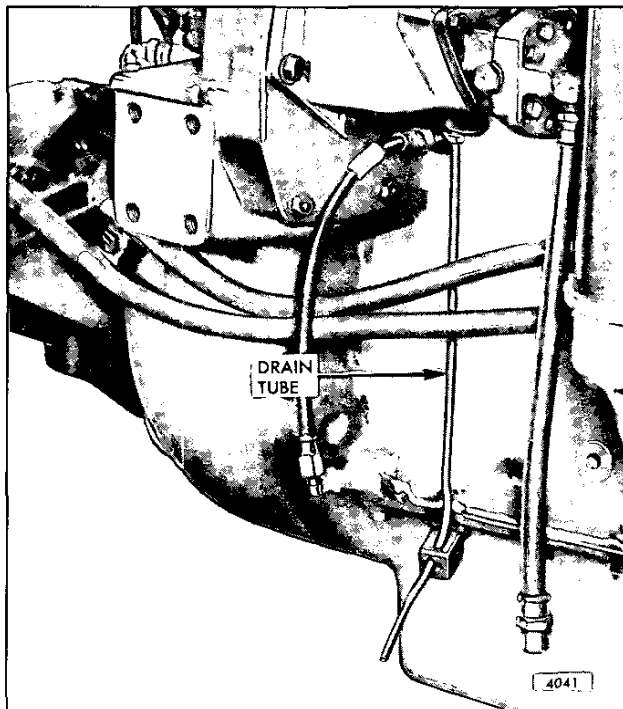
Air Box Drain Tube Mounting (In-Line Engines)
